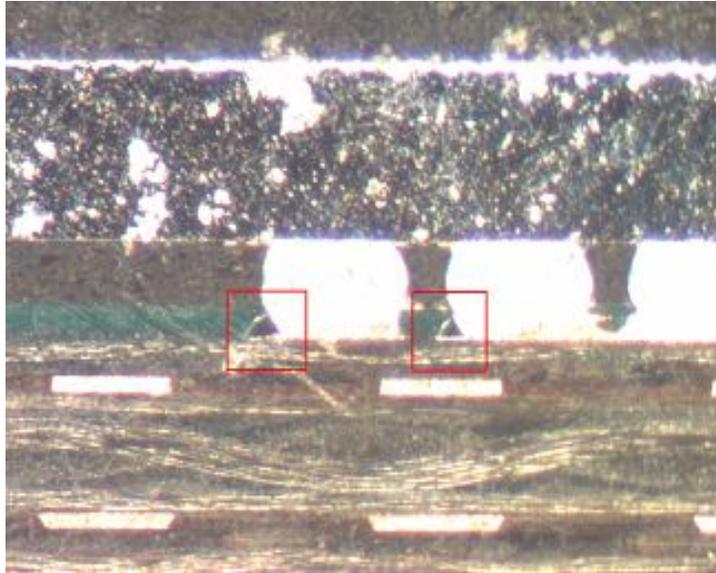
Epoxy 1 Test Board Showing Voids at Solder Ball Pads with no Solder Extrusion, 1200 Cycles
